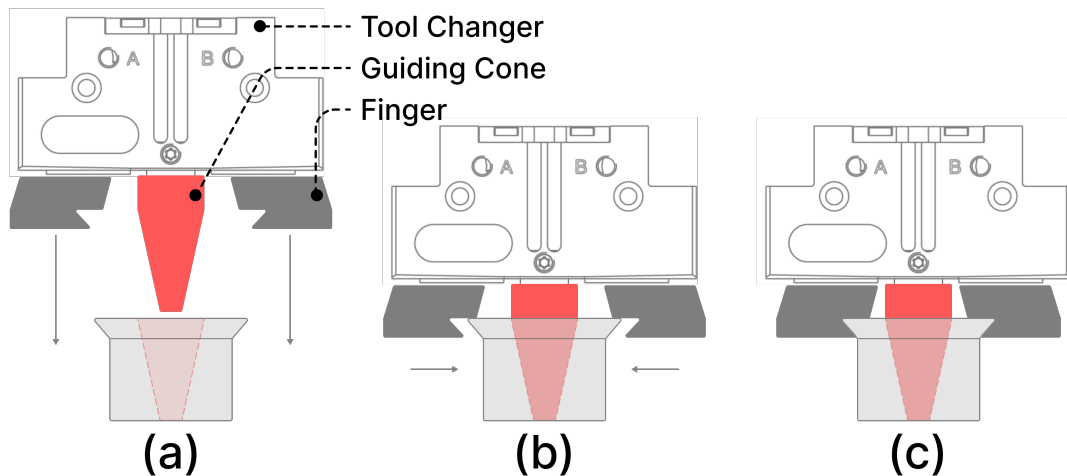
Tool Changer Mechanism Details [7]: (a) A guiding cone aligns the tool changer to the correct grasping position, (b) Compressed air actuates the tool changer’s fingers for a secure grip, (c) The tool changer fully locks onto the tool plate for robust attachment.
